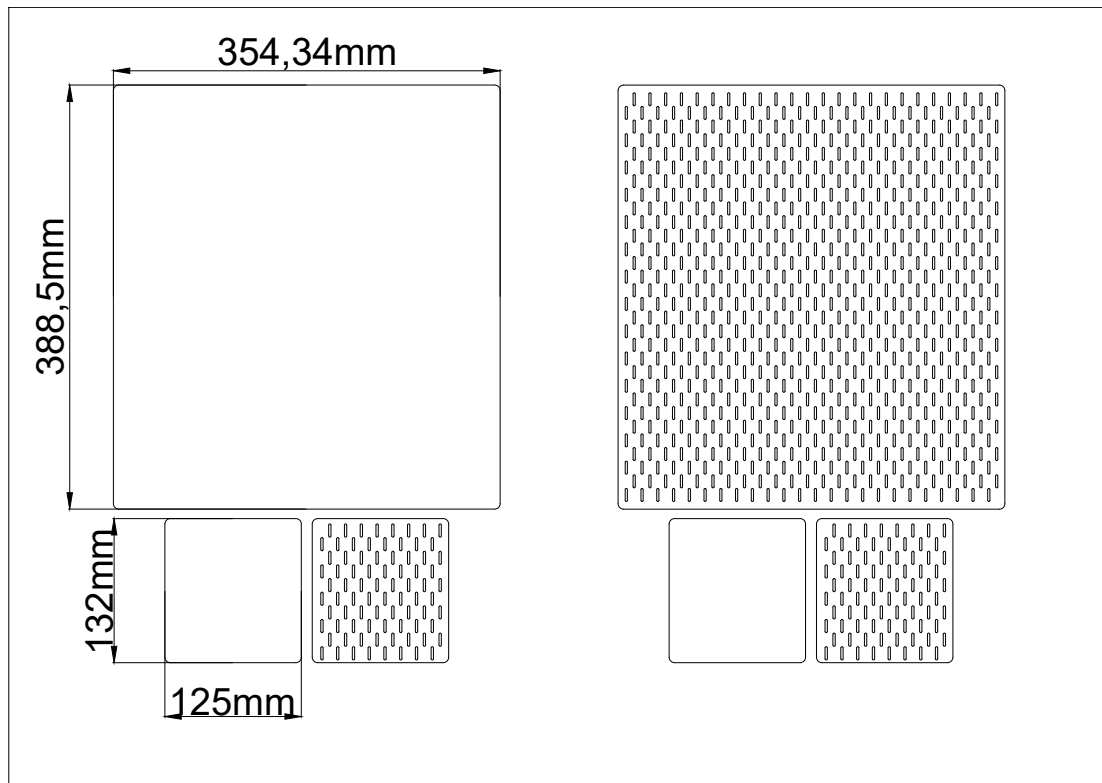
Nesting drawings used to cut the face sheets on the waterjet machine.
